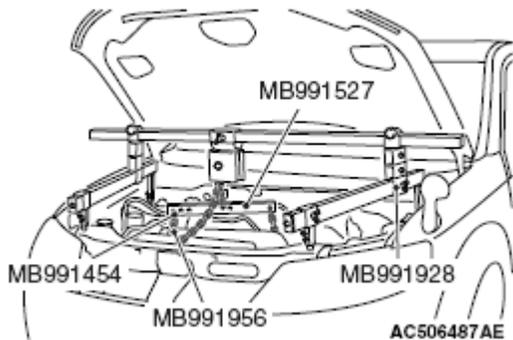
Identifying Special Tool Engine Hanger (MB991928 Or MB991956)
